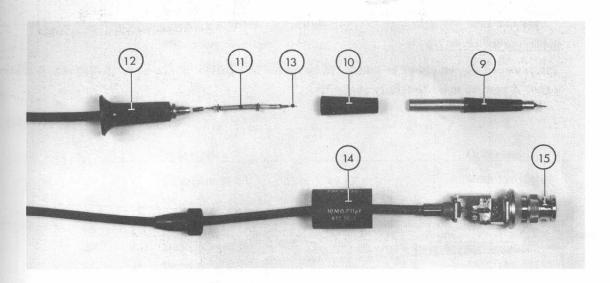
Assembly of the probe PM 9336 - PM 9336L
